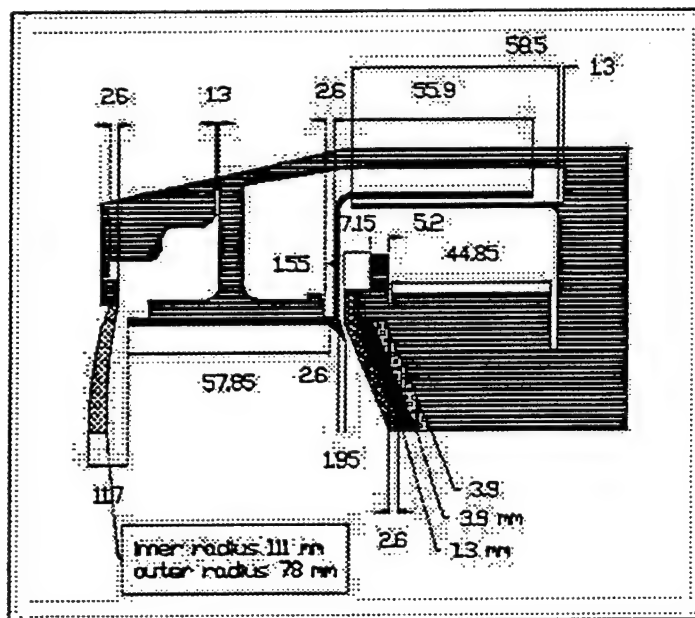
Dimensioned drawing of the sensor. (The lens radii were later determined to be 163 mm and 96 mm.)
